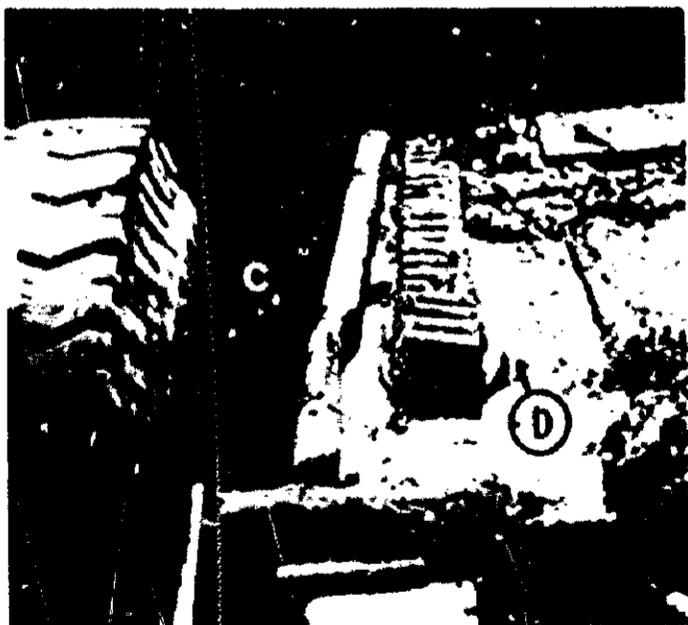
Left-side stationary rail of tractor-mounted fifth wheel assembly showing deformed sliding rail channel (C), and twisted fifth wheel positioning rail (D). (Lower component.)
